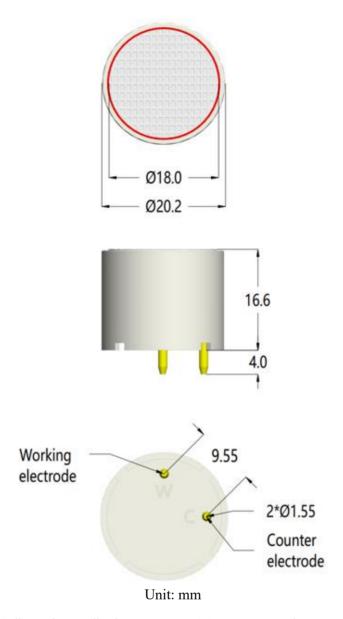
ACM2000 dimensions. All tolerances are \pm 0.1 mm except tolerance of pins (\pm 0.05 mm).
